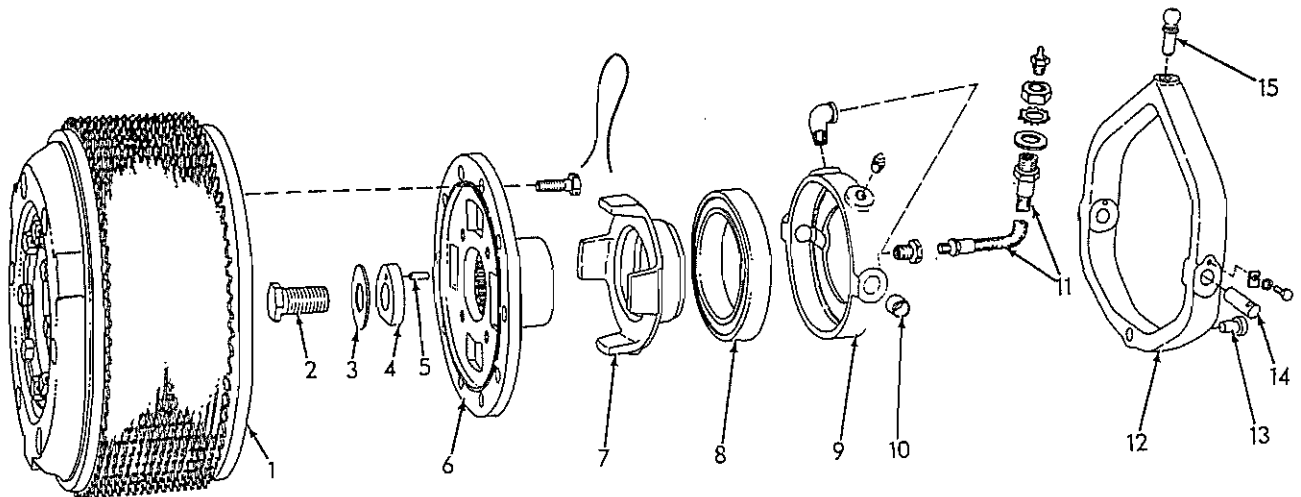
Clutch Throwout Parts (HD11 Shown, HD6 Similar)
